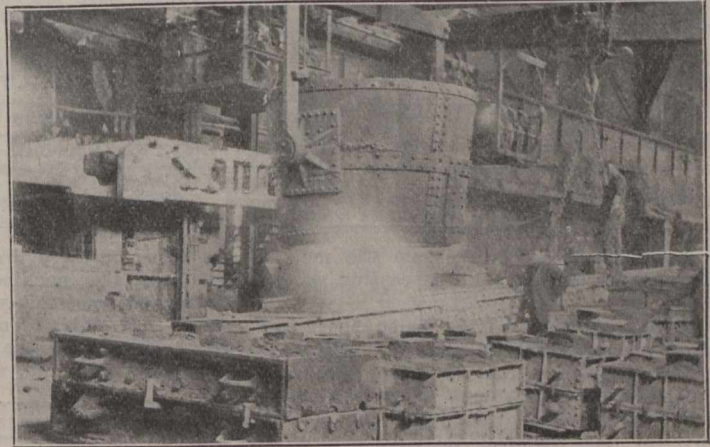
Pouring a Cast Steel Locomotive Frame.
